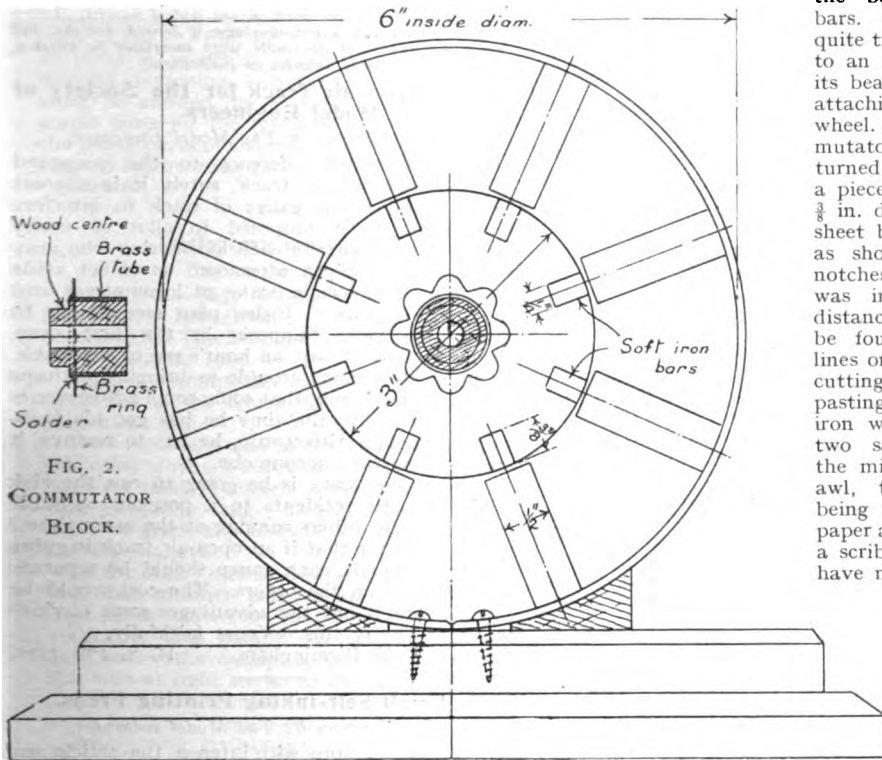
SECTIONAL ELEVATION OF MOTOR. (Half full size.)
